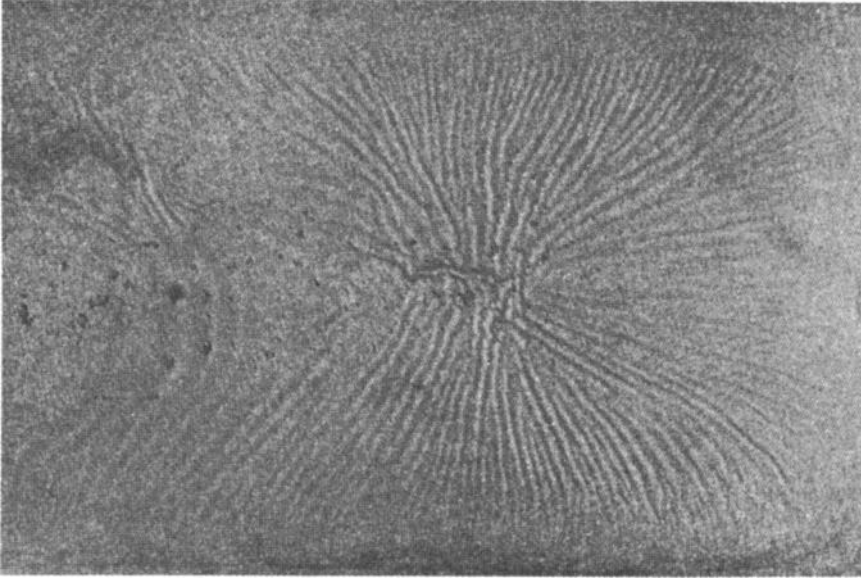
Rippled appearance of a fused or molten tool surface due to carburization. Unmagnified photograph
